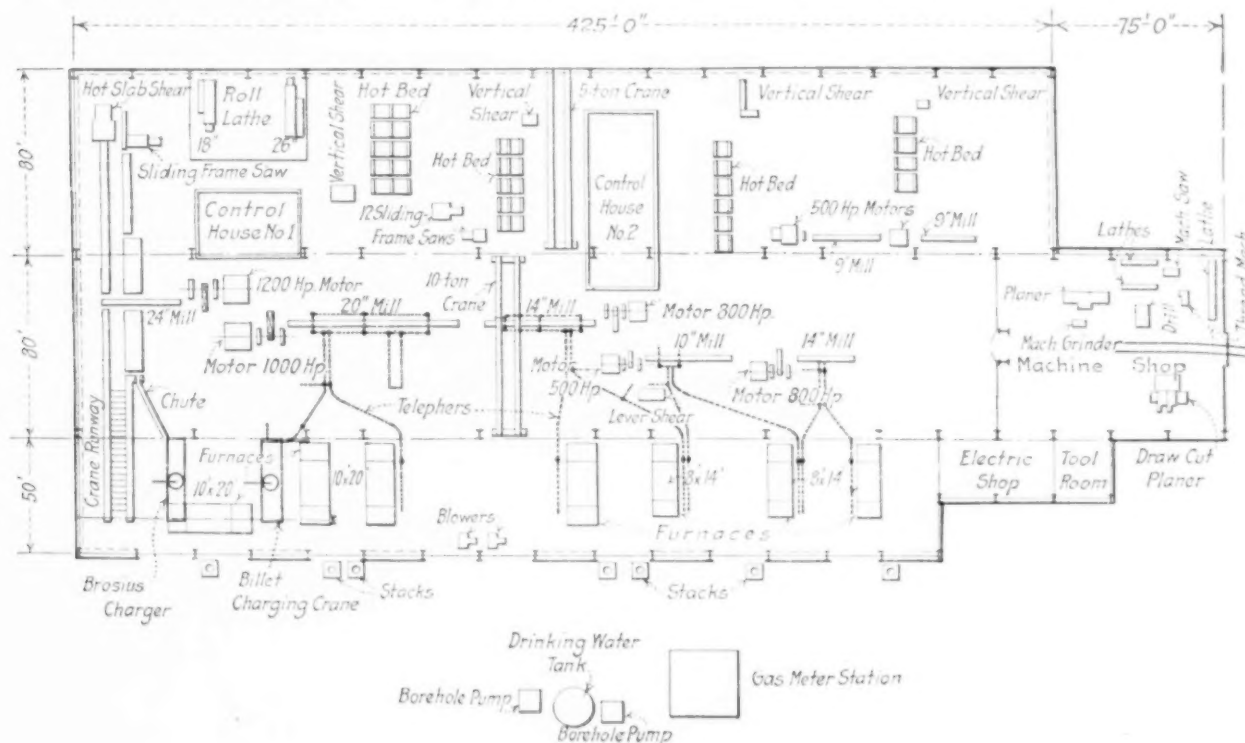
GENERAL PLAN OF MERCHANT MILL
